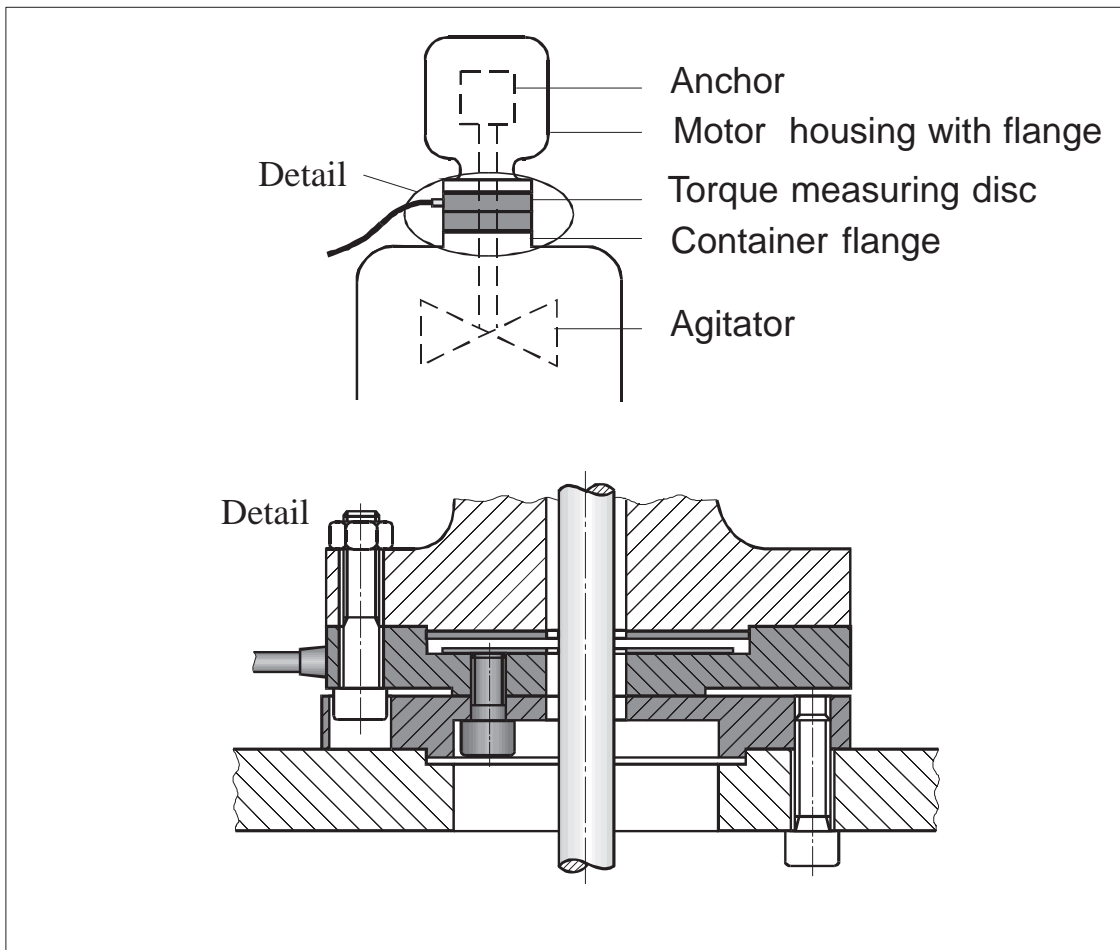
Reaction torque measurement using a TB1A torque measuring disk between the motor housing and the container
